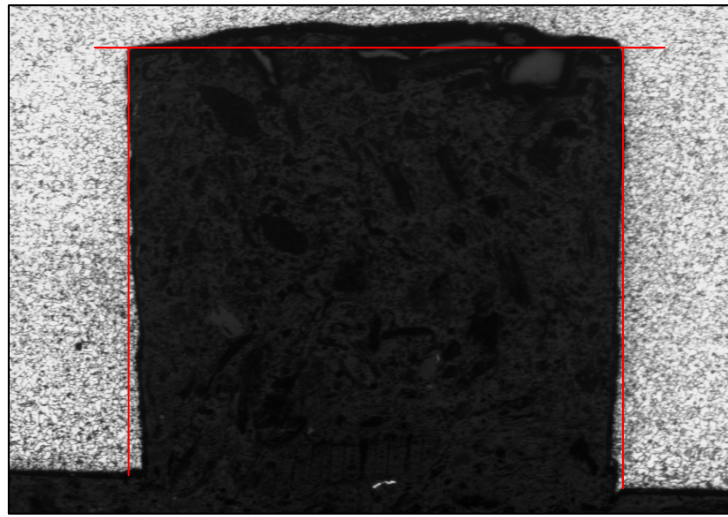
Cross-sectional view of drilled hole – 7,5mm LASER SIDE
